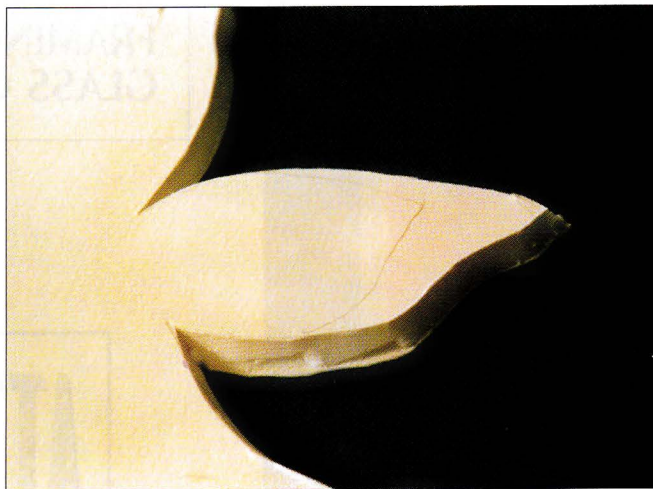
B: This detail bevel cut clearly shows bunching during the hand cutting.
